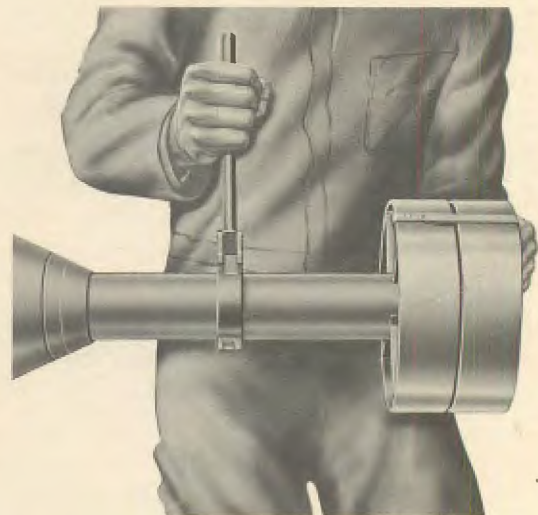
Use of Strap Wrench in Assembly of Head and Motor.
